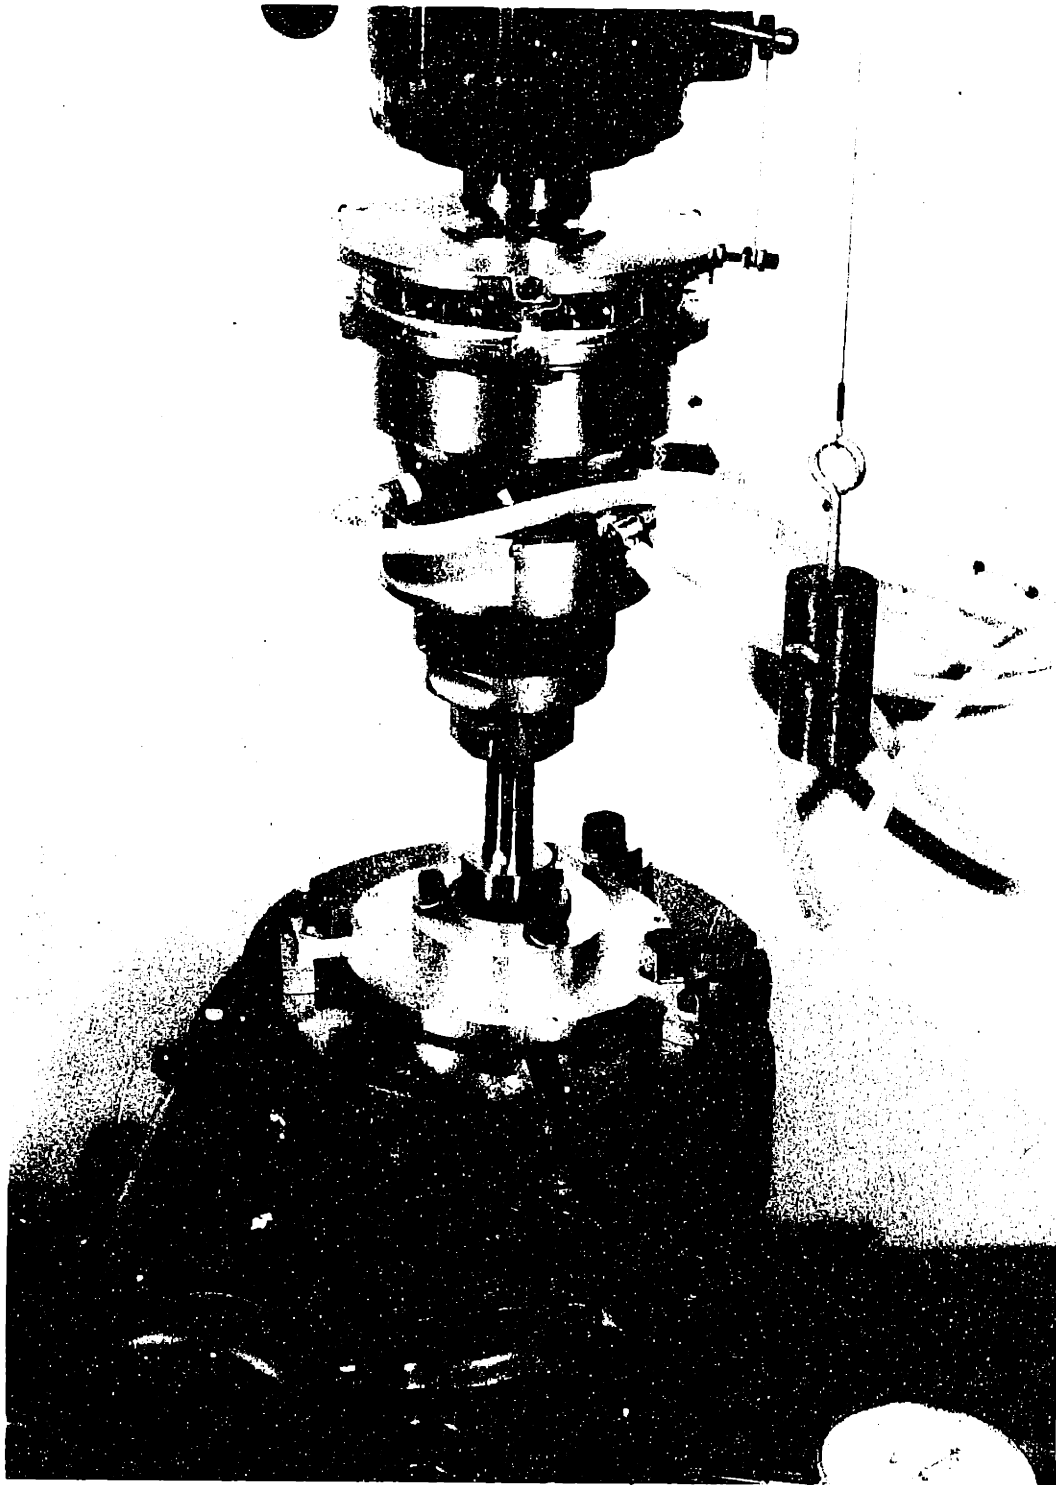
Close-up view of the insertion of the steel test plug into a drill bushing using simplified apparatus and the more sensitive aluminum six-axis force sensor.
